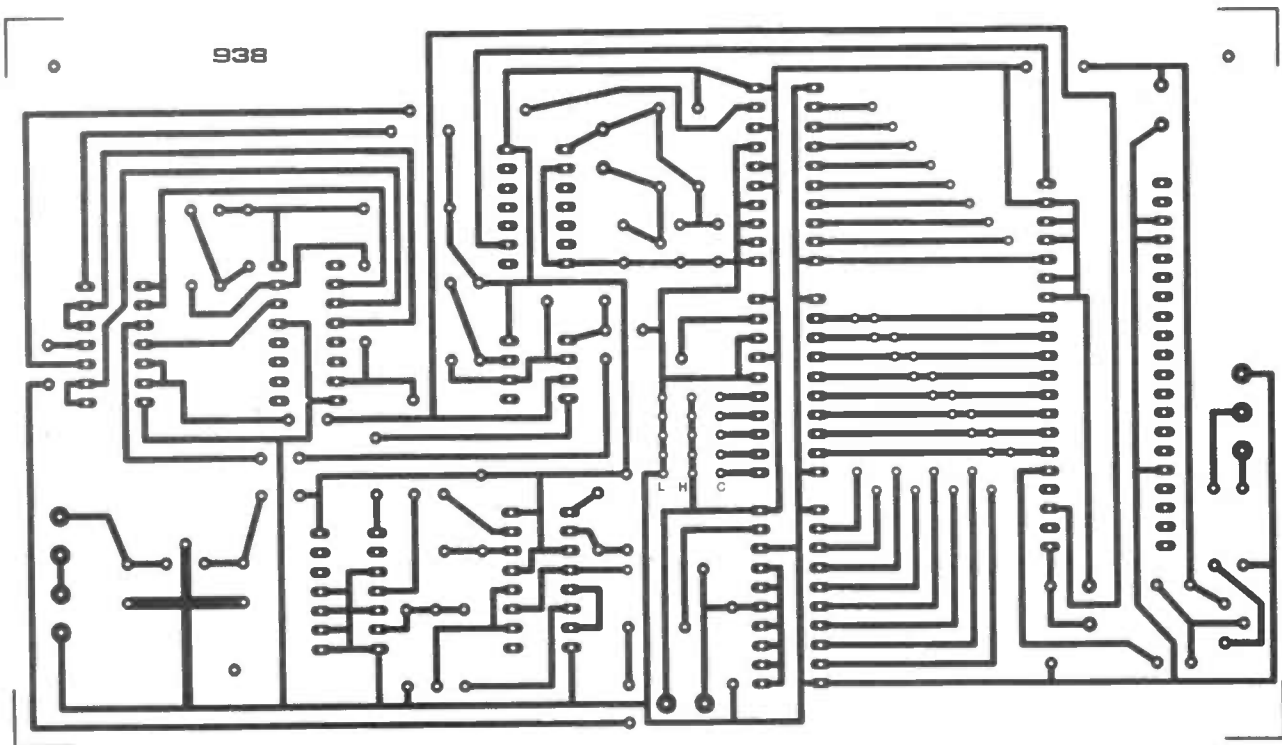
Full size underside copper foil master pattern for the MIDI Pedal.
